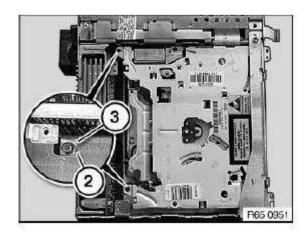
DVD Drive Screws And Lugs Courtesy of BMW OF NORTH AMERICA, INC.
